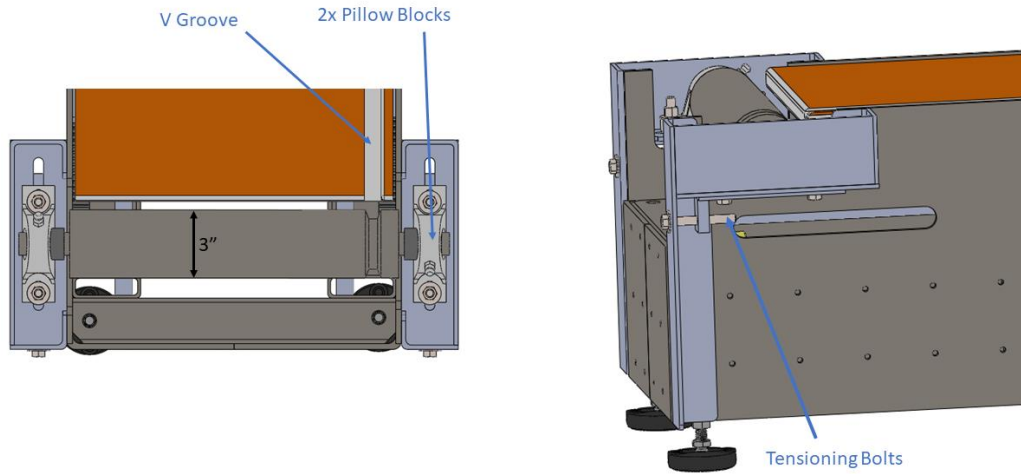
Treadmill Rear Roller (Left) Without the Belt Showing "V" Groove and Rear Pillow Blocks (Right)
